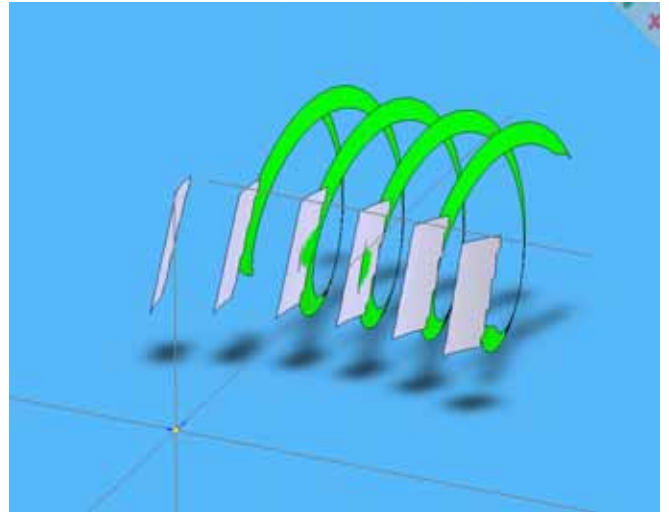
Tooth Contact Analysis of Archimedian Screw Worm and Involutes Helical Wheel by 3D/CAD
